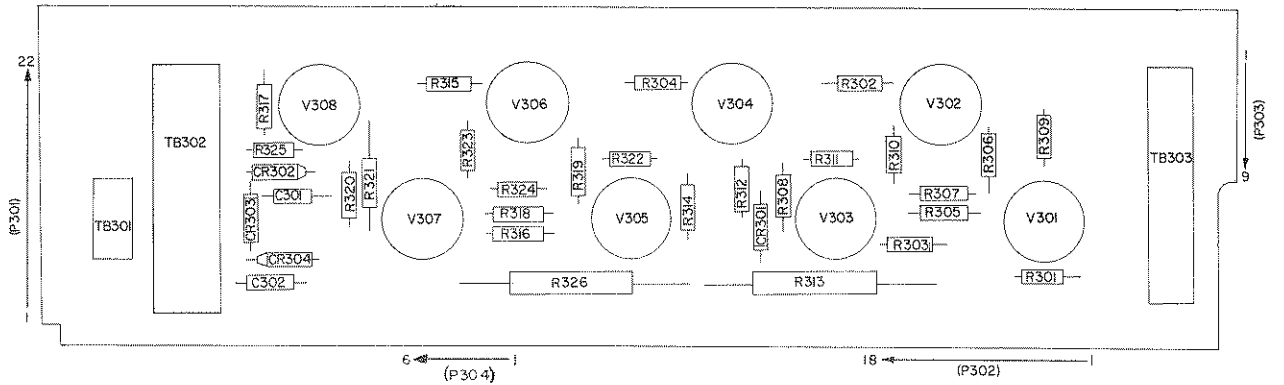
COMPONENT LOCATION, ASSEMBLY A3.
